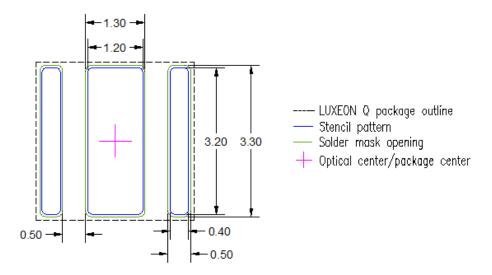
Recommended LUXEON Q PCB footprint layout showing the solder mask and stencil pattern.
